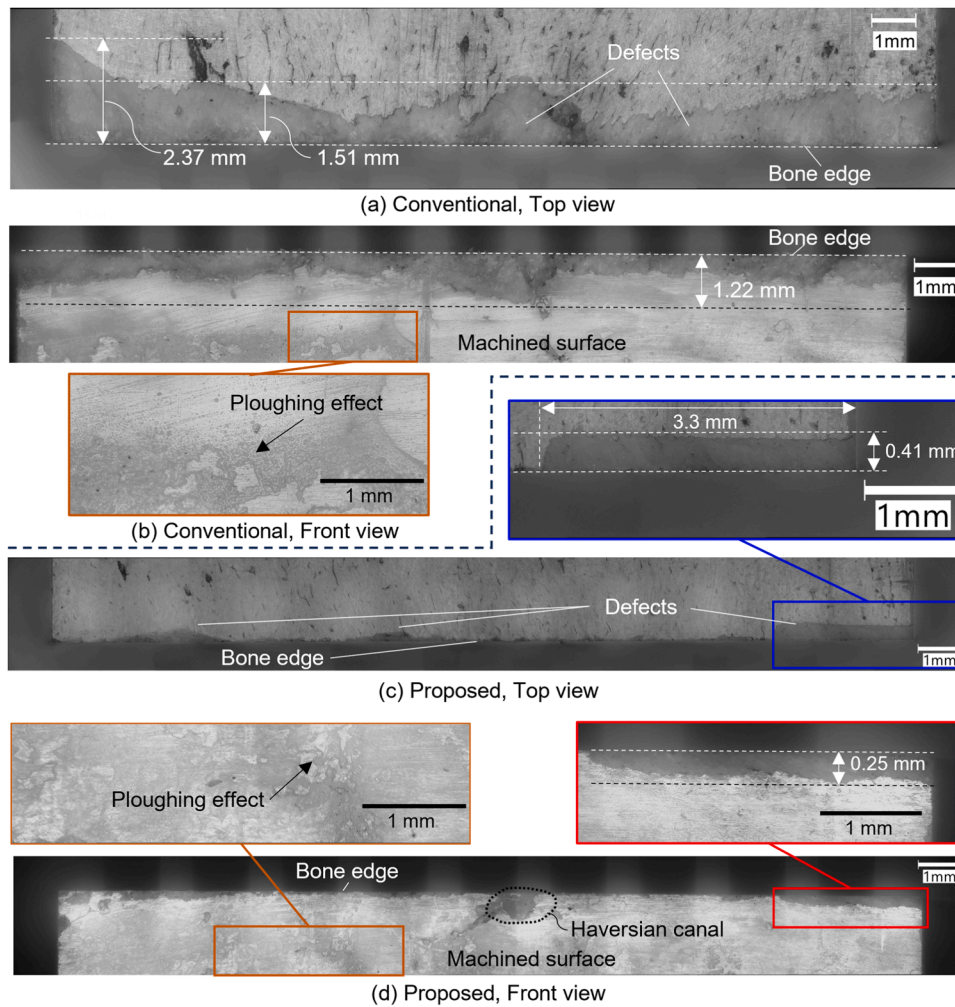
Defects on the machined surface after the through groove cutting. (a, b) Conventional mechanism. (c, d) Proposed mechanism. Experimental conditions: 600 CPM, 6 mm/min, Blade A, cortical bone (30 mm width). Defects on the bone edge are observed in the [supplementary material 3](#).
